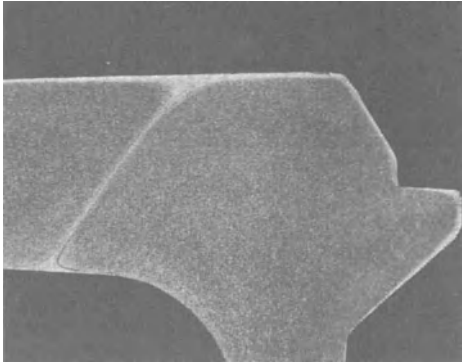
Development of transverse weld in the cross-section of a simple hollow section. (Courtesy of Alcan International.)
